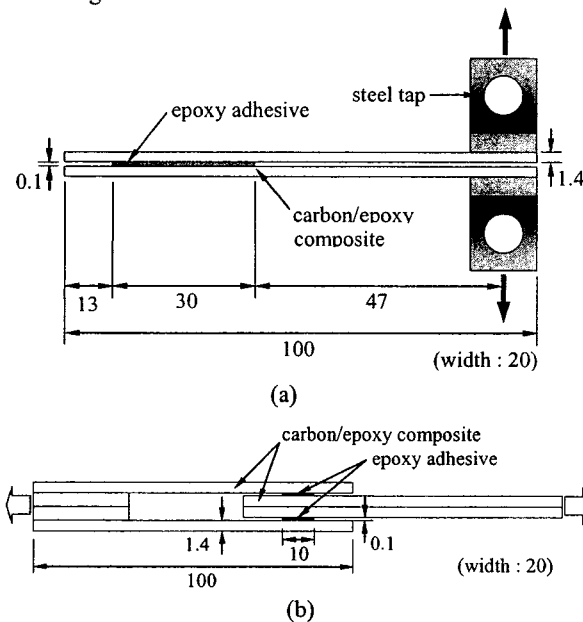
Dimensions of specimens for (a) peel test and (b) double lap shear test, (units in mm).
